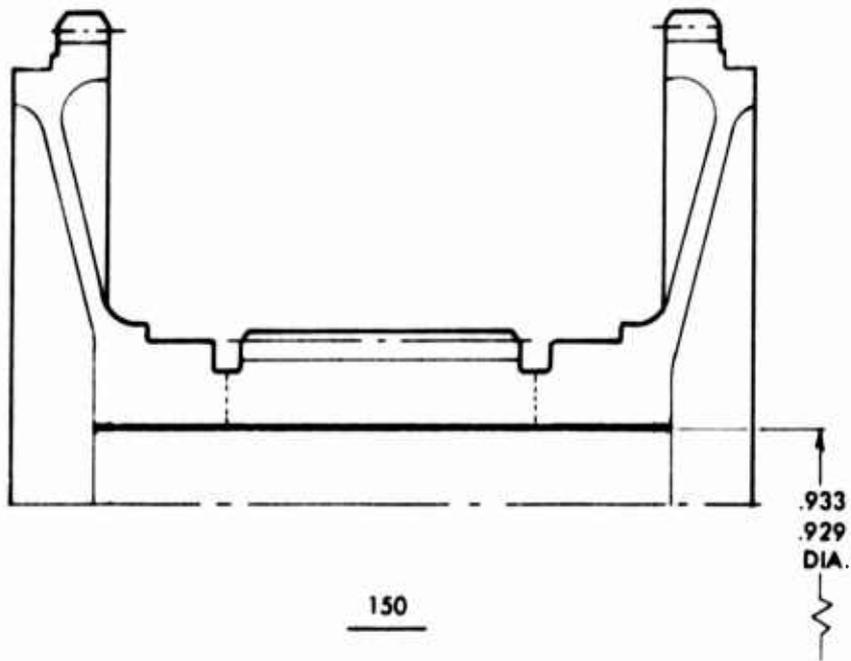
RG351-11182-063, Machine Operation Drawing.
